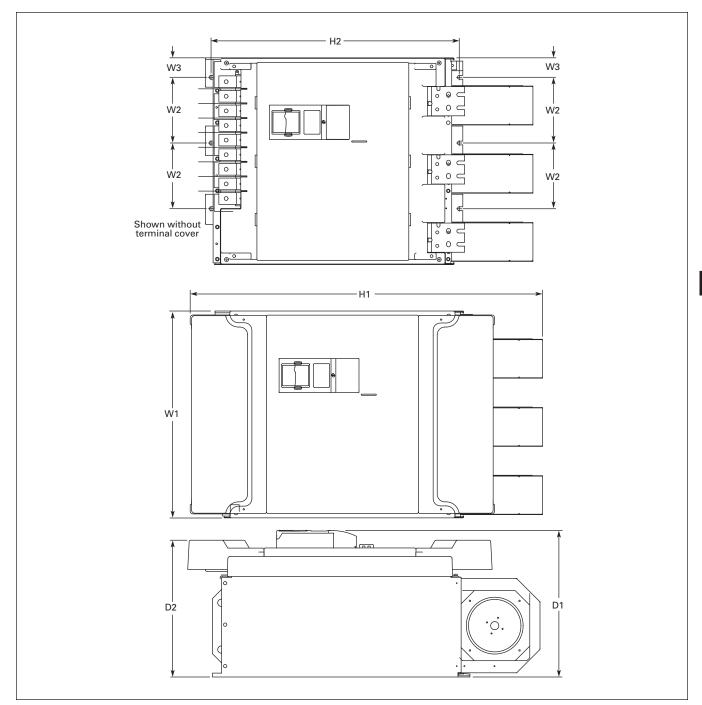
9000X Dimensions, FR11 Open Chassis
